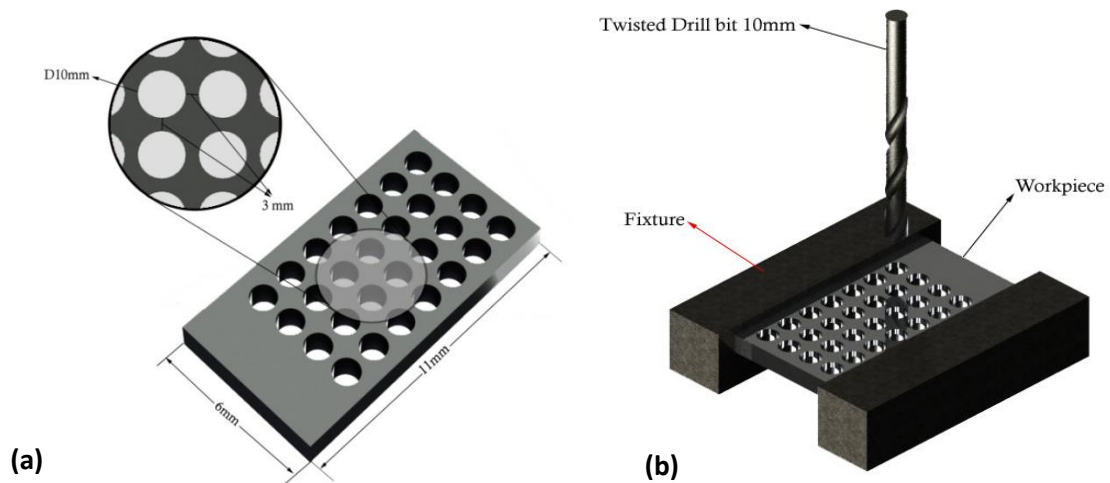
(a) Work piece dimensions (b) Fixture to hold work piece
